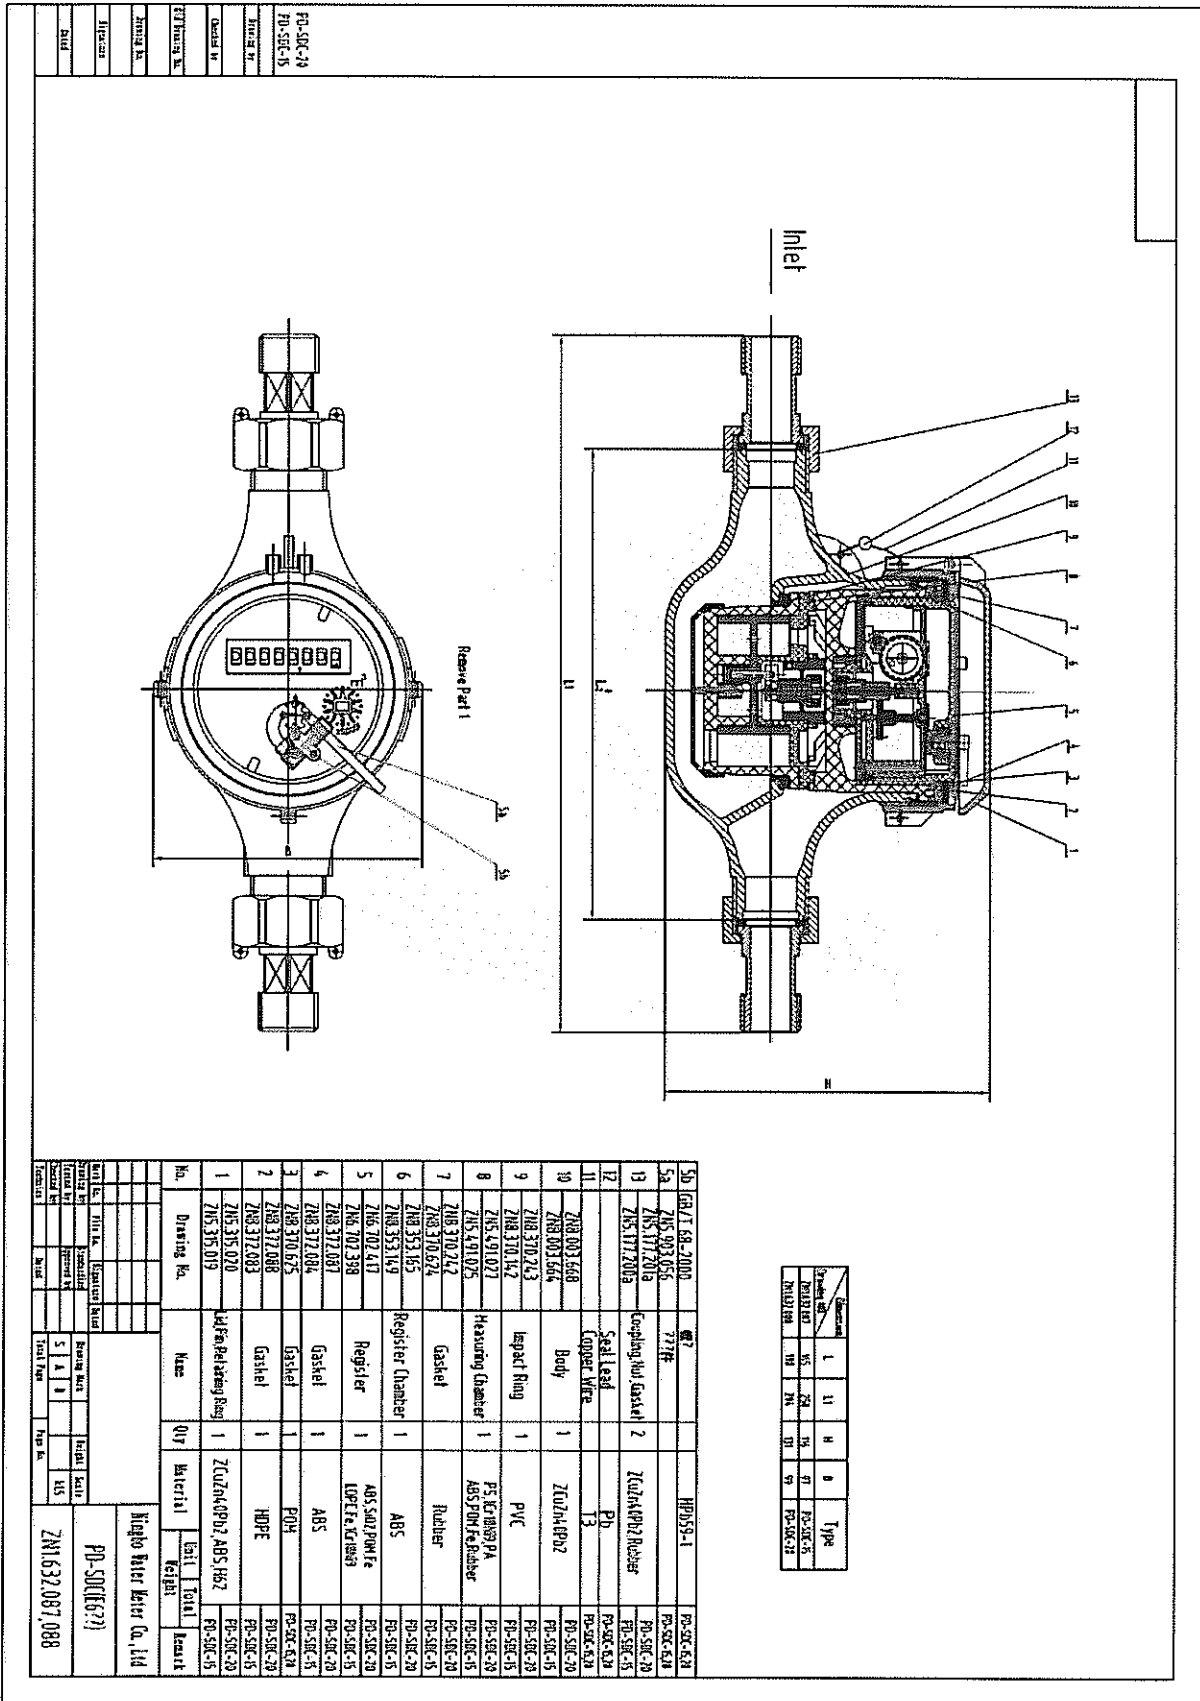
The water meter type PD-SDC (E8) assembly drawings:
